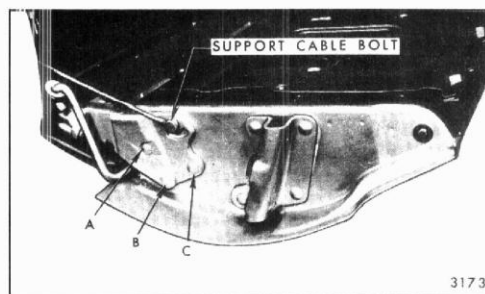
Dual Acting Tail Gate Left Lower Hinge-Removal "B" Body Shown- "A" Body Typical
